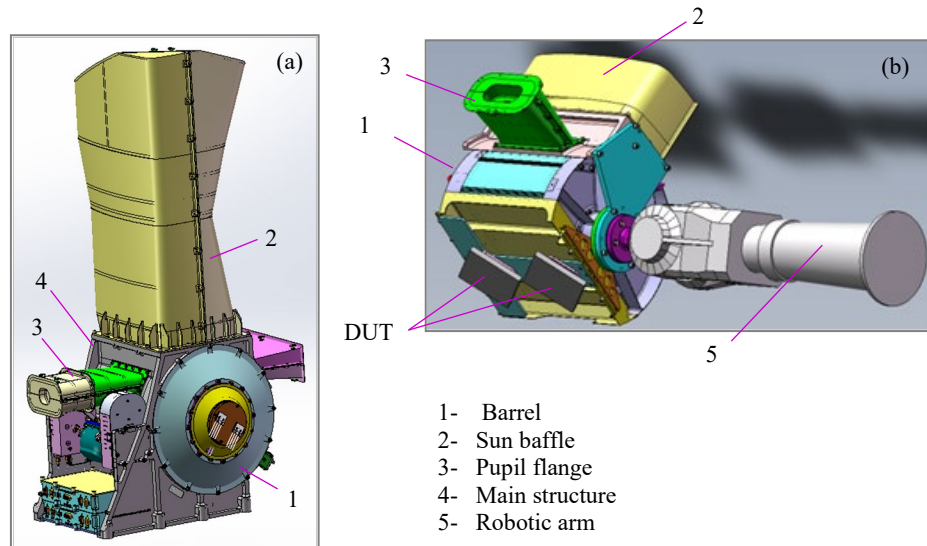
FCU mechanism (3D CAD models): (a) general view; (b) an exploded-view drawing of the barrel-baffles assembly and mechanical interfacing with the robotic arm.
